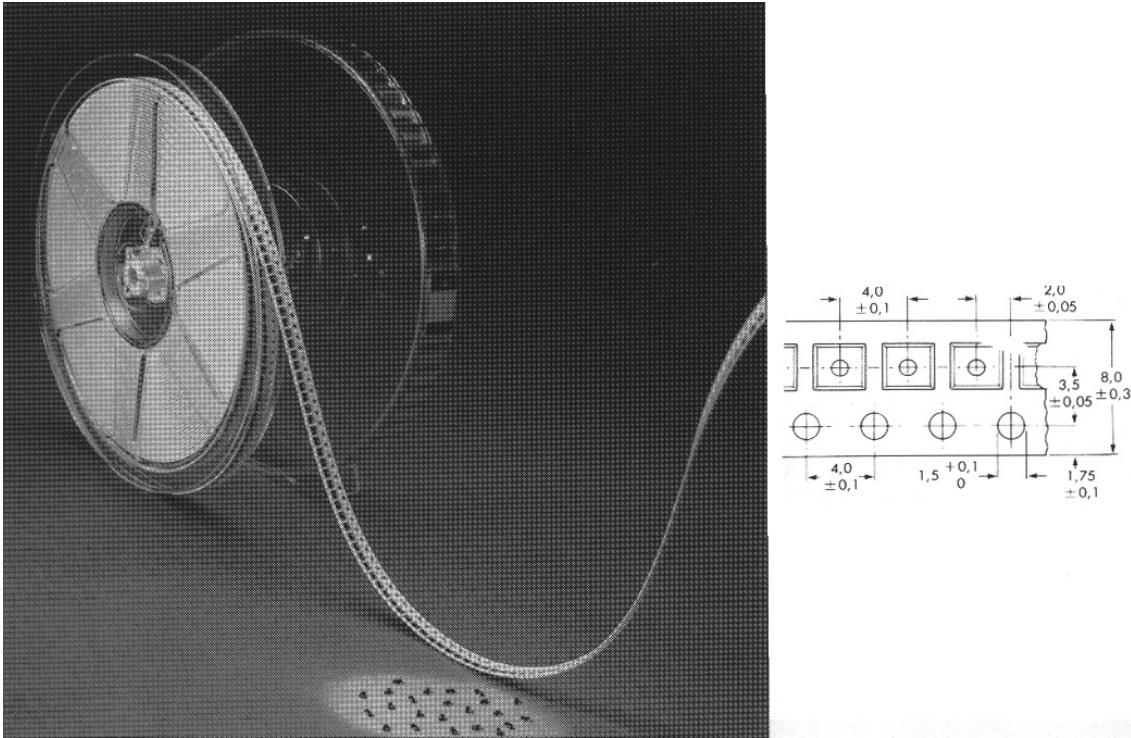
Blister tape for surface mounted components. Standard dimensions for 8 mm wide tape.
